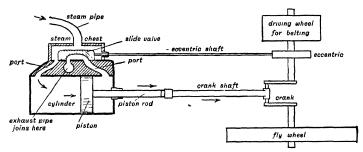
PLAN SHOWING THE CHIEF PARTS OF A STEAM ENGINE EMPLOYED FOR DRIVING MACHINERY IN FACTORIES, ETC.
